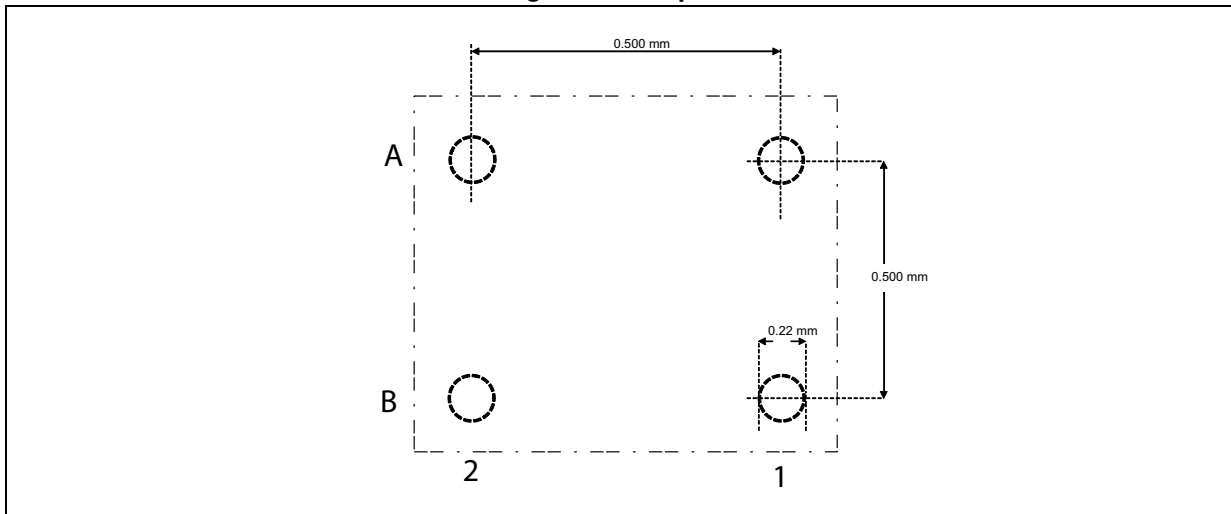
Footprint - 3 mils stencil - non solder mask defined
